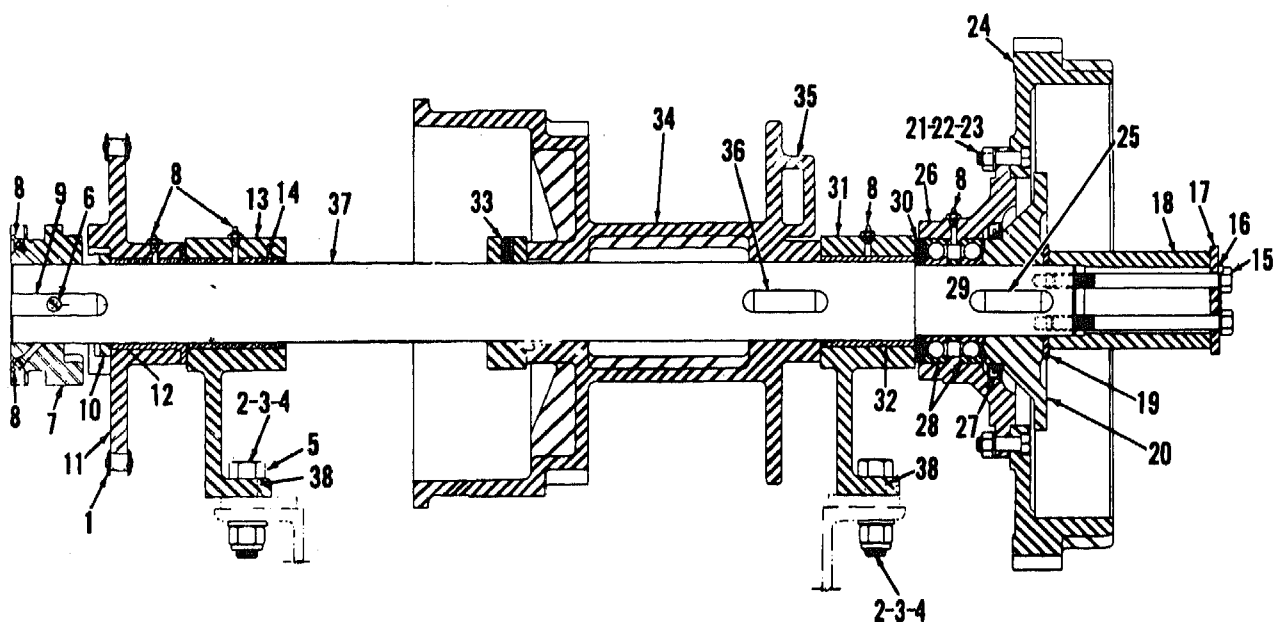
Crane independent boom hoist shaft assembly, removal and installation.
